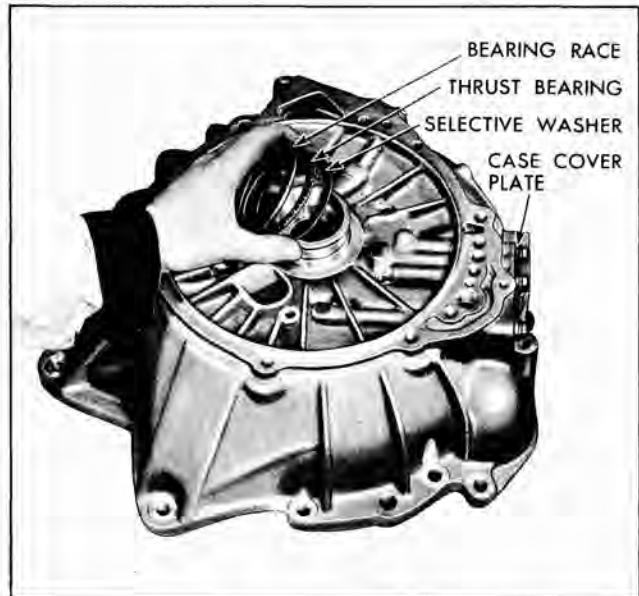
Case Cover Thrust Bearing and Selective Washer
